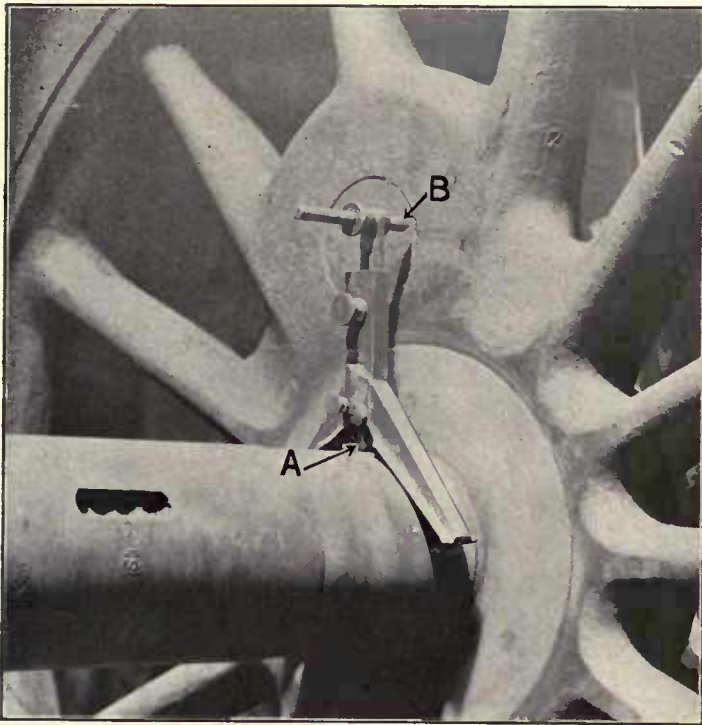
Tool for Checking Proper Location of Driving Wheel on Axle.
